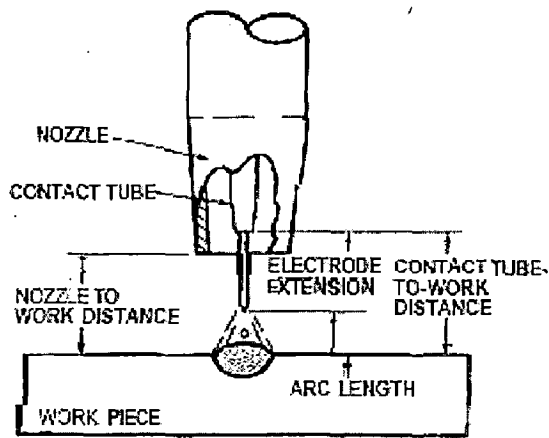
Gas Metal Arc Welding Terminology [67]
